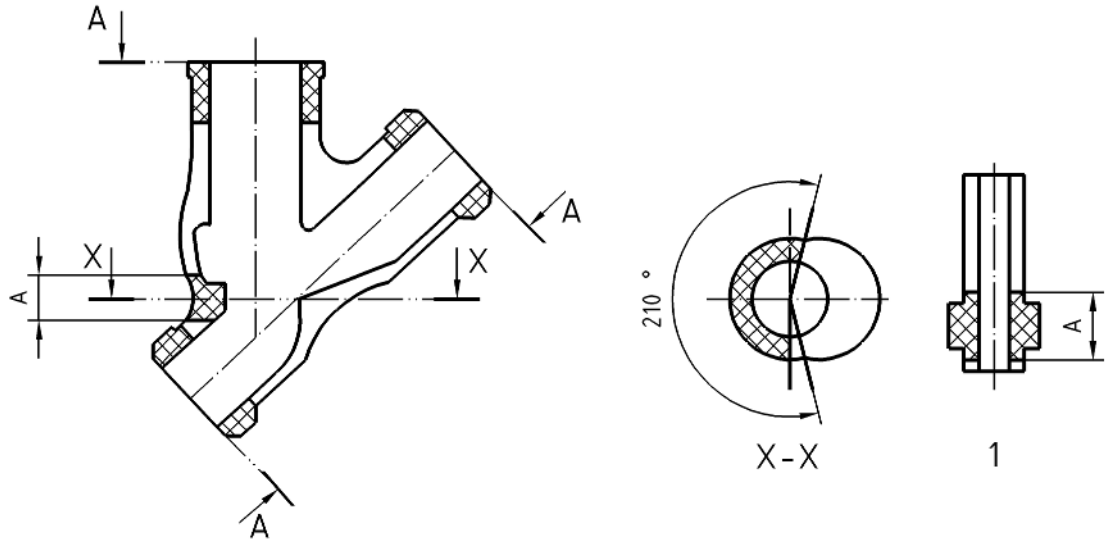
Typical casting section showing required radiographic examination of Y pattern globe valve body and bonnet (pressure seal bonnet)
